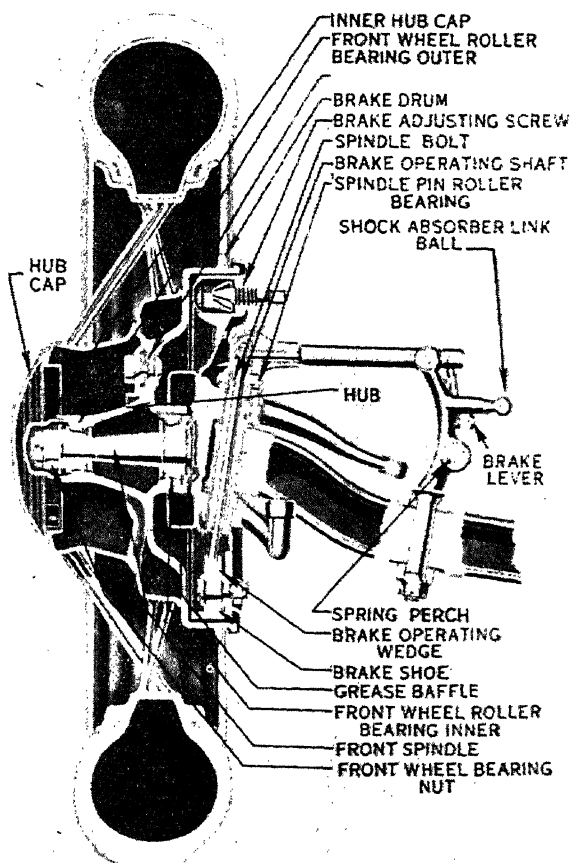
The Ford Wire Spoked Front Wheel, showing Hub Construction.
